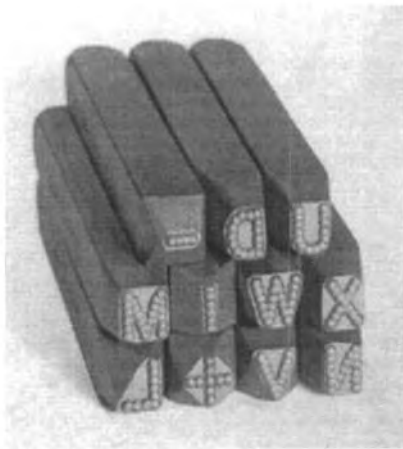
I2 Tools for stamp-indented markings. The dot pattern of each die reduces the stresses induced in the workpiece surface from the operation. (Courtesy Pannier Corporation.)
